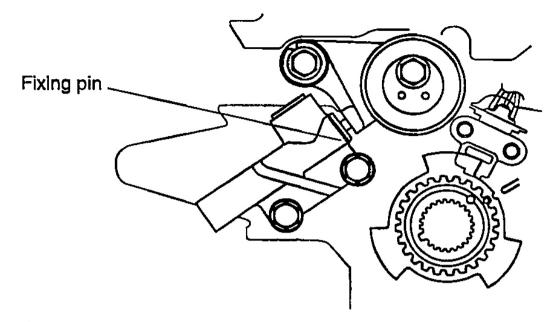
Removing Auto Tensioner Fixing Pin Courtesy of KIA MOTORS AMERICA, INC.
